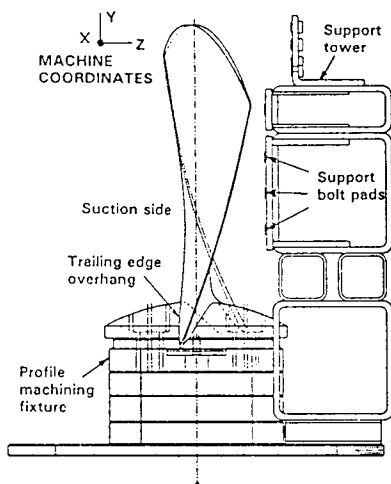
PROFILE MACHINING SET-UP (side view)
